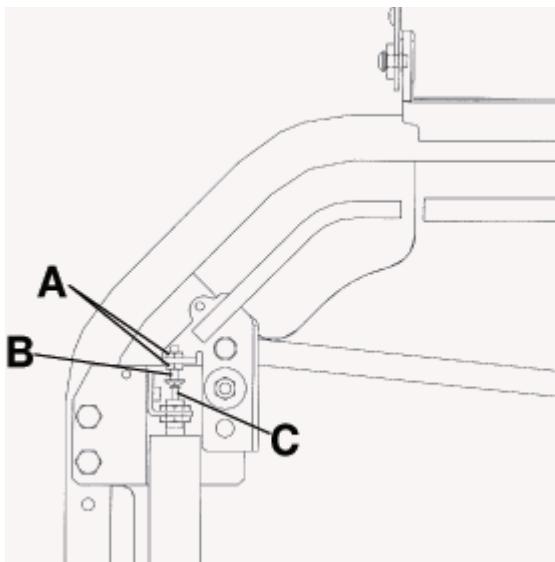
5051 Pneumatic Fowler backrest adjustment
